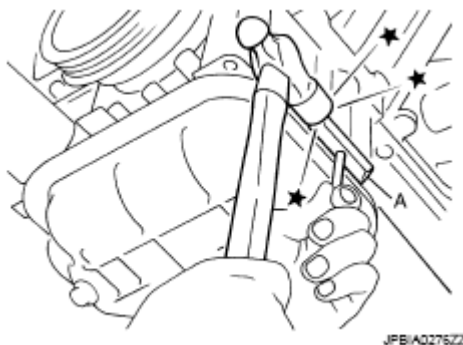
Inserting Seal Cutter Between Oil Pan (Upper) And Oil Pan (Lower)
